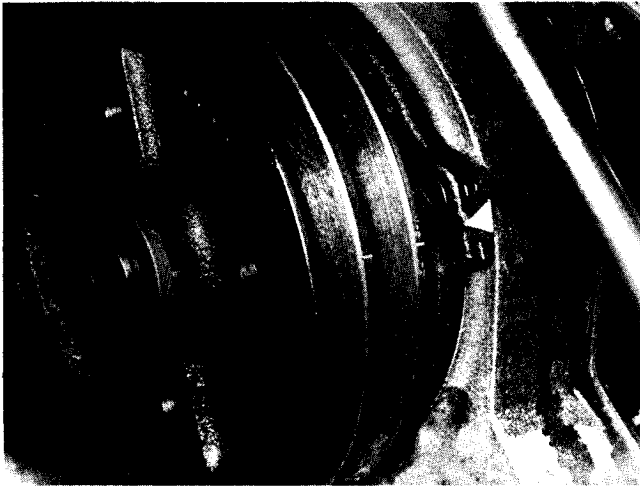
, (V514127). Valve set mark on accessory drive — V-903
